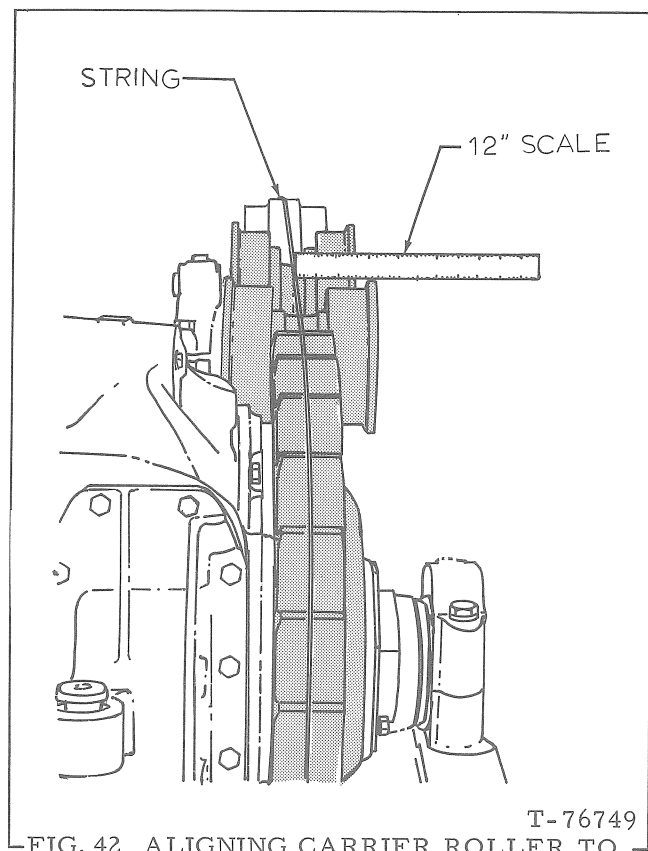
ALIGNING CARRIER ROLLER TO TRACK IDLER AND SPROCKET
